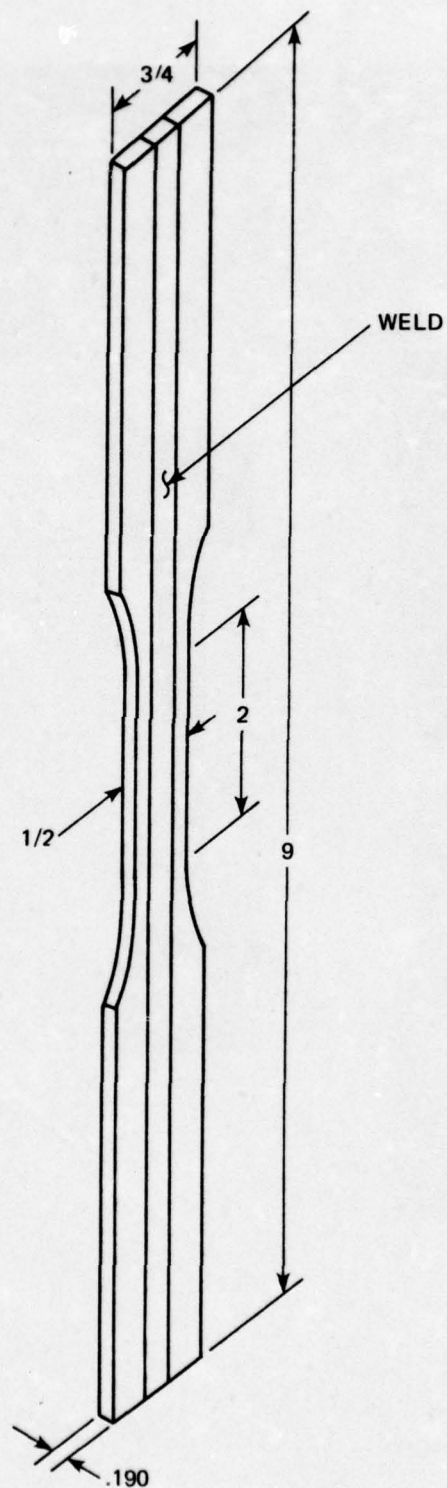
Longitudinal Weld Tensile Coupon (TGS 5359)
